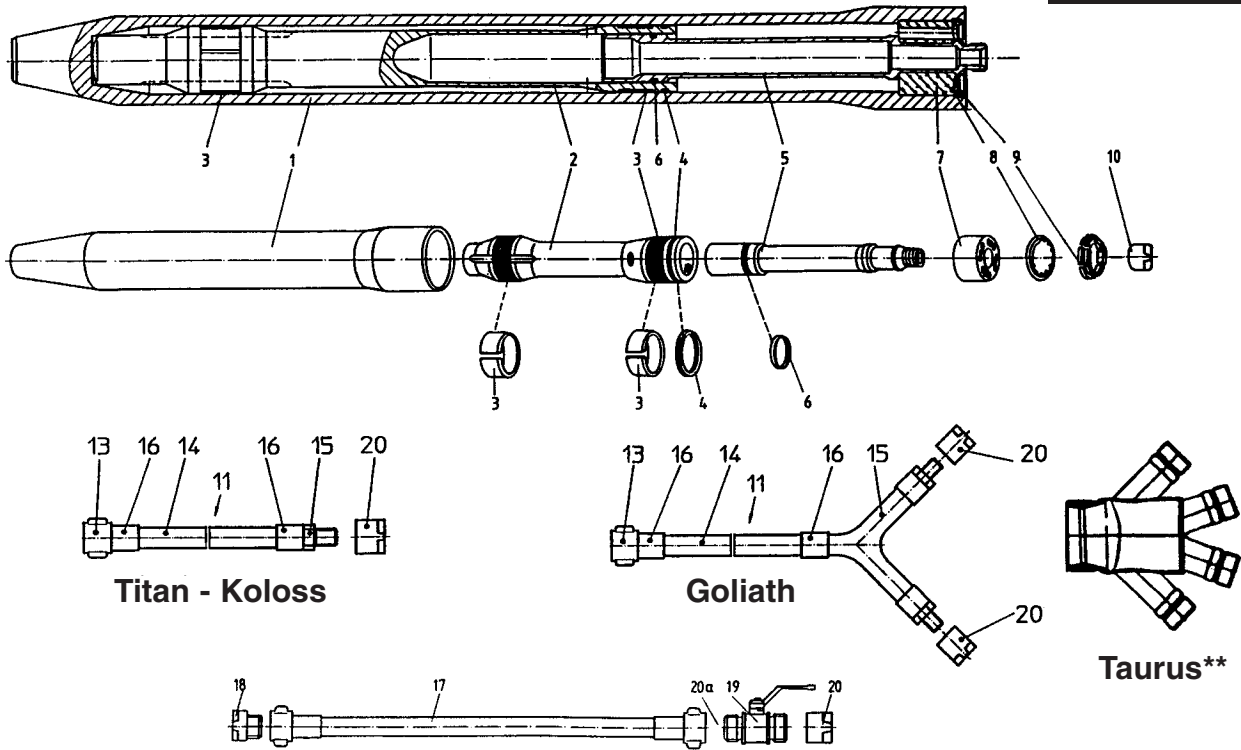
PARTS BREAKDOWN FOR THE GRUNDORAM TOOL
